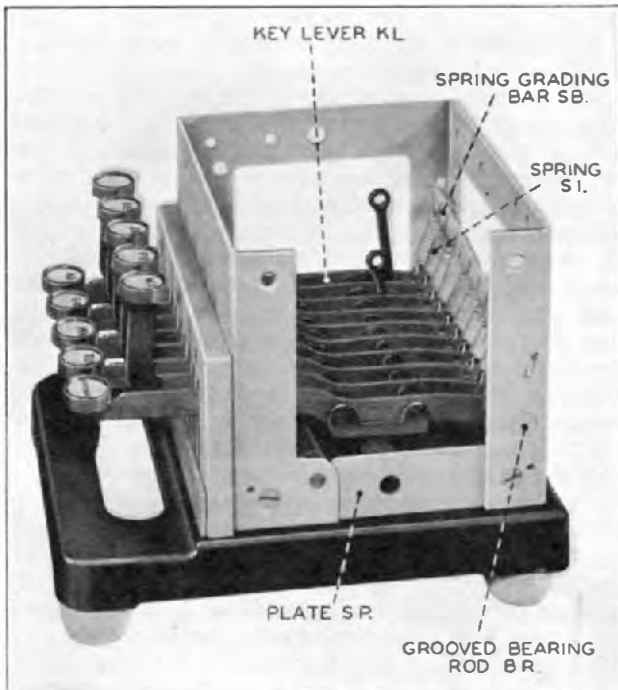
DIGIT KEY ASSEMBLY AND FRAME.
